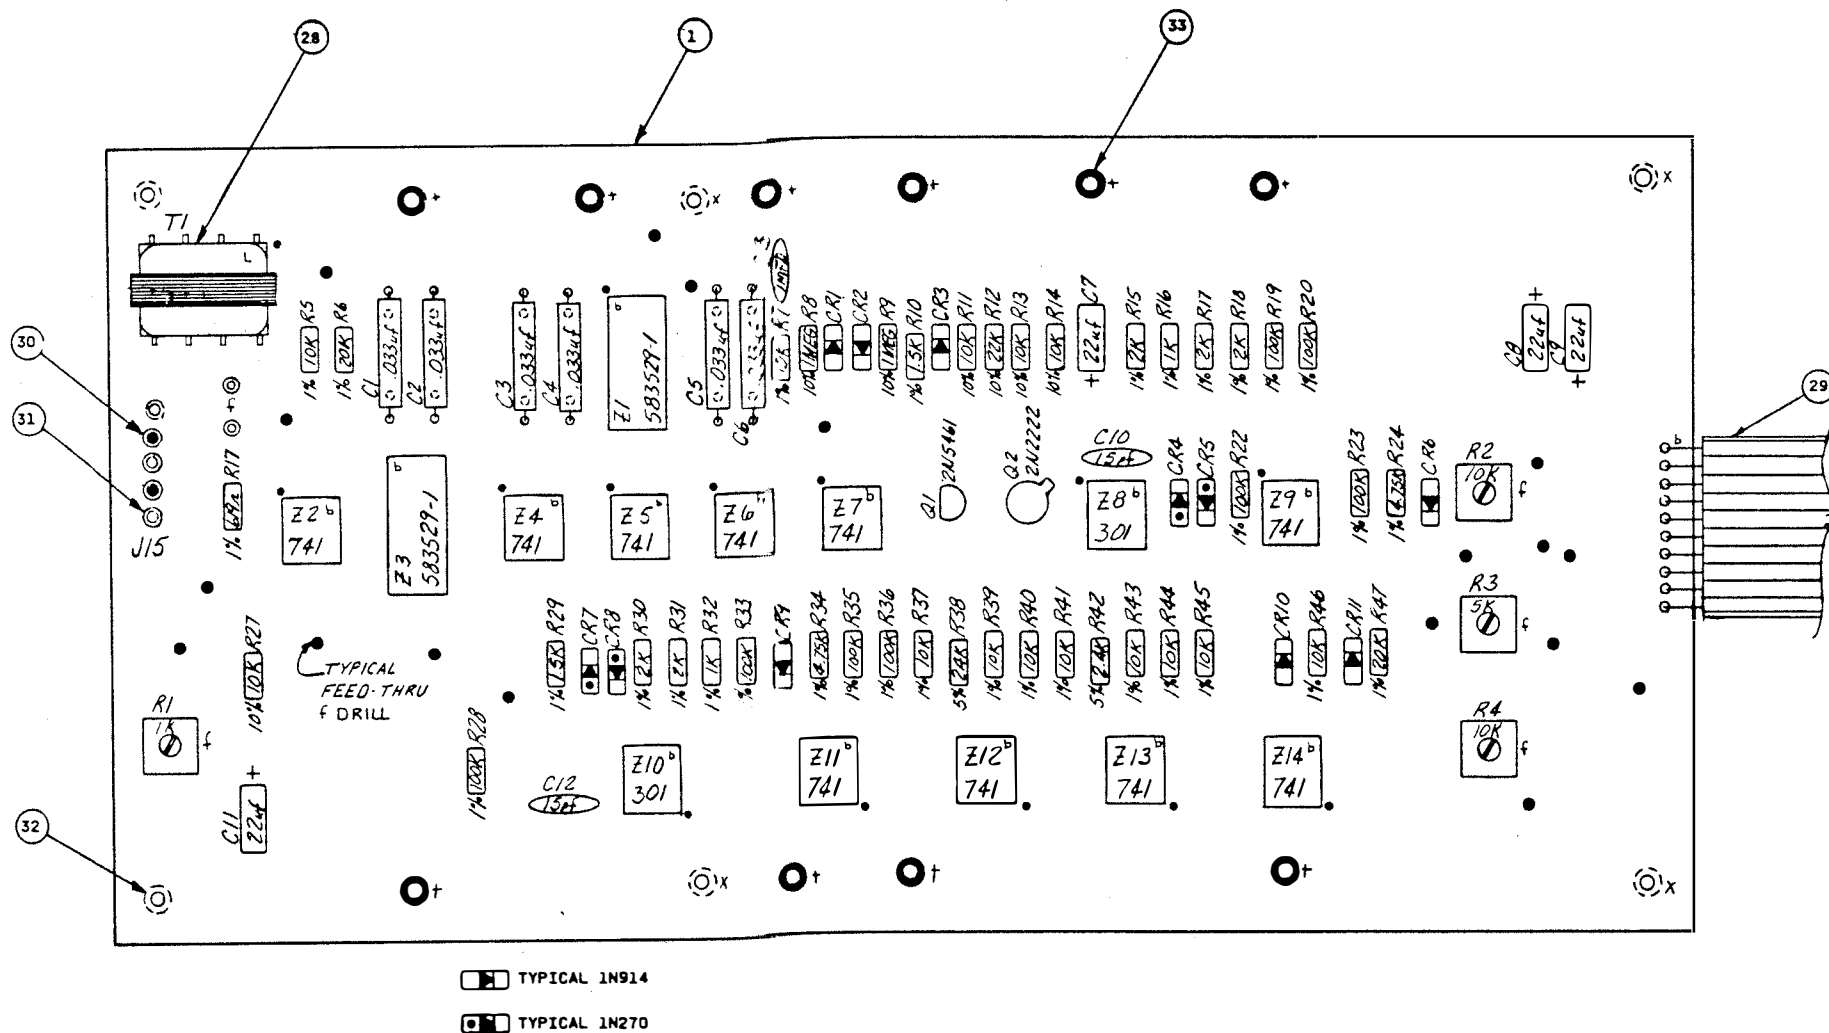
Optional Diversity Demodulator Board NO1490 Assembly
